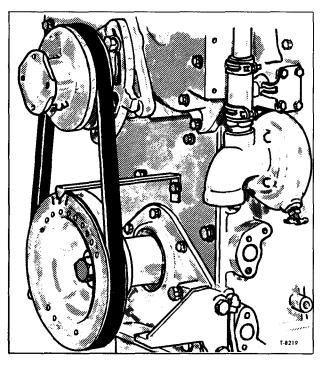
Pointer Installation for Marking Top-Dead-Center (Typical)
